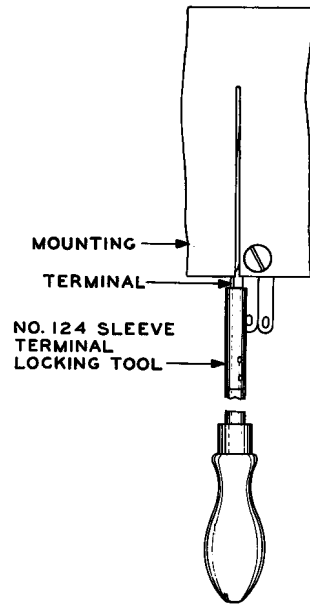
Method of Locking Sleeve Terminal With 124 Sleeve Terminal Locking Tool
